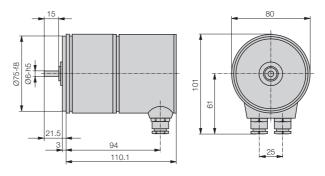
Basic unit with additional gear (fixation see Fig. 12).
